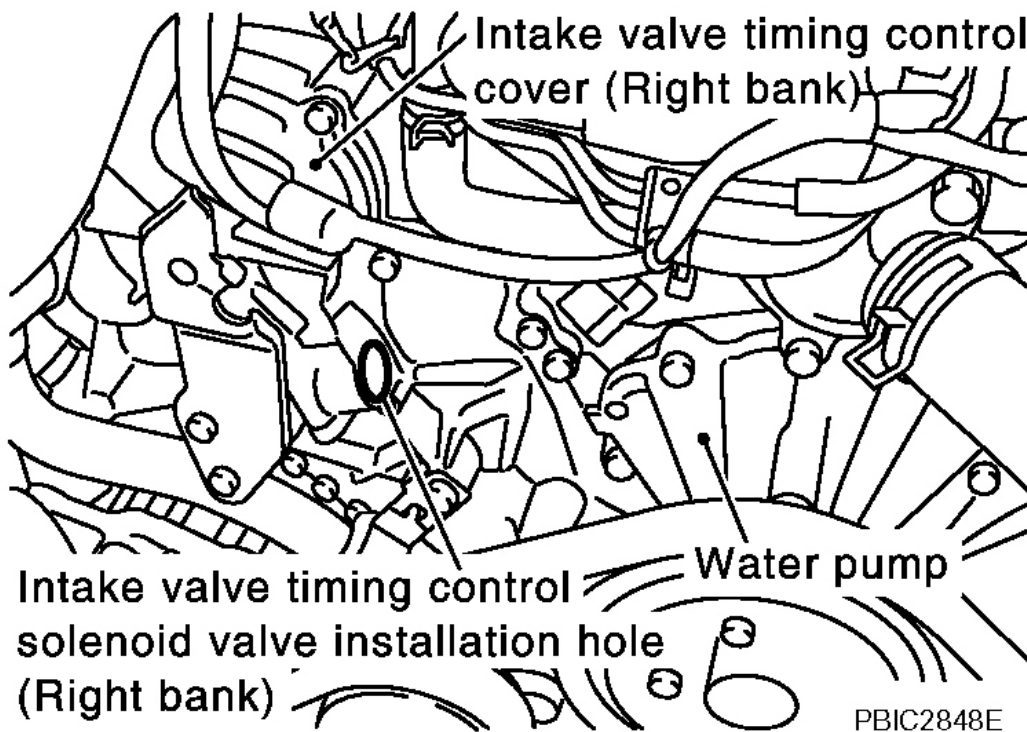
Identifying Components Between Intake Valve Timing Control Solenoid Valve And Camshaft Sprocket
